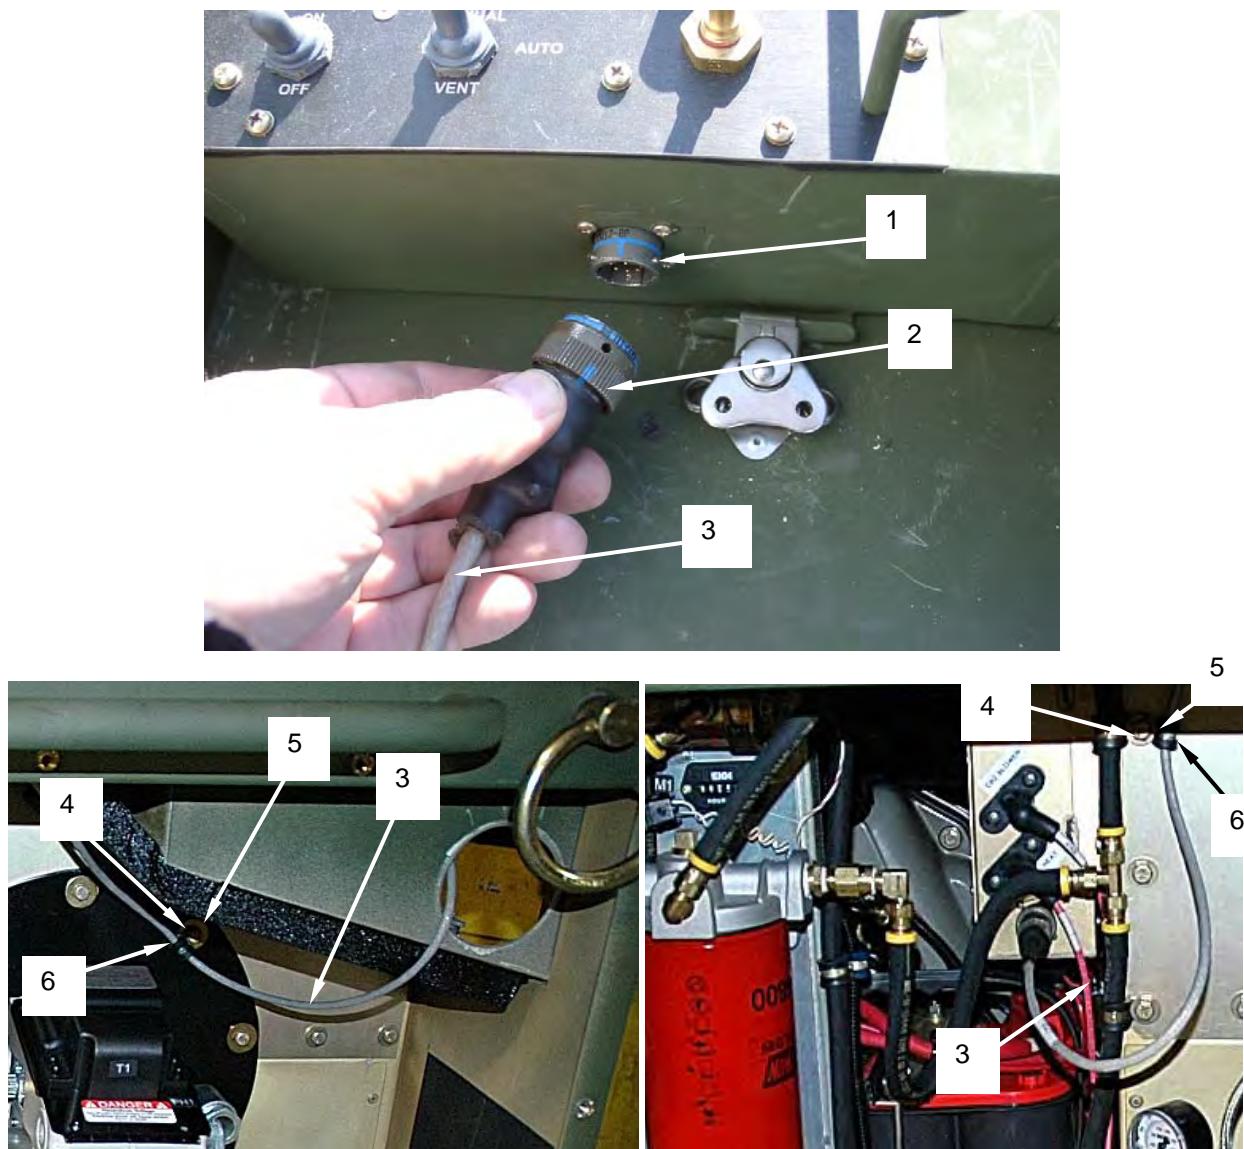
Replace Operator Control Box Cable Assembly (Sheet 1 of 2).
